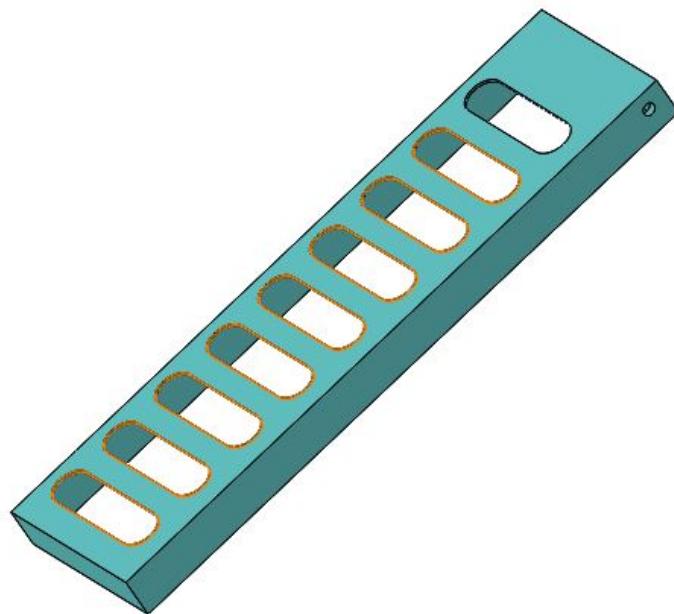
Ferrarer, Auston: Top Bed Bracket
